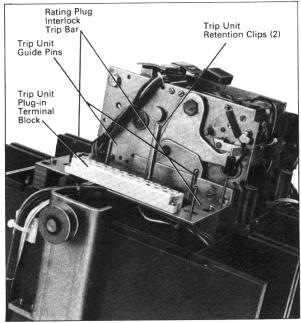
SPB Breaker Ready to Receive Digitrip RMS Trip Unit Assembly
